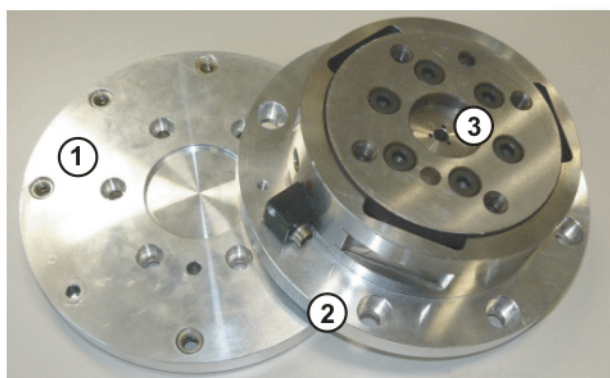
Sensor with intermediate flange – flange plates separated
